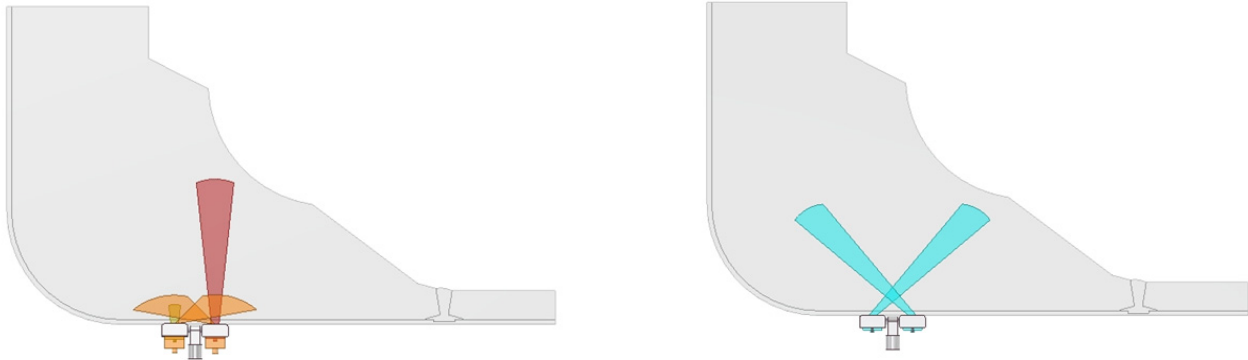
Nozzle Weld Inspection PA Probes Arrangement
